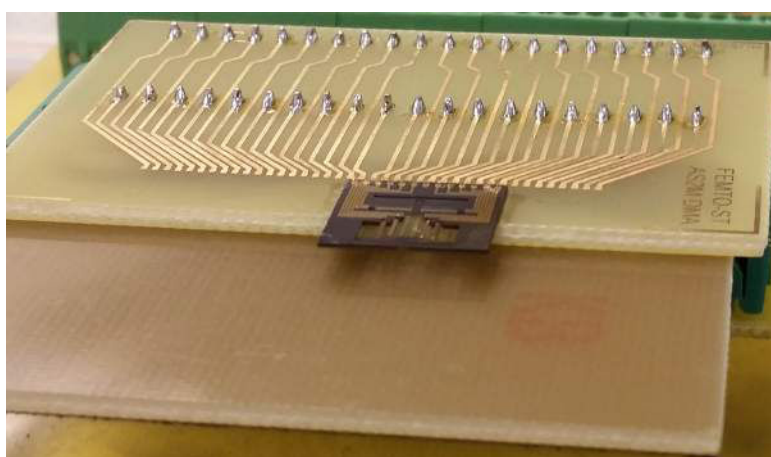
A multistable module prototype glued and wire bonded on a PCB
